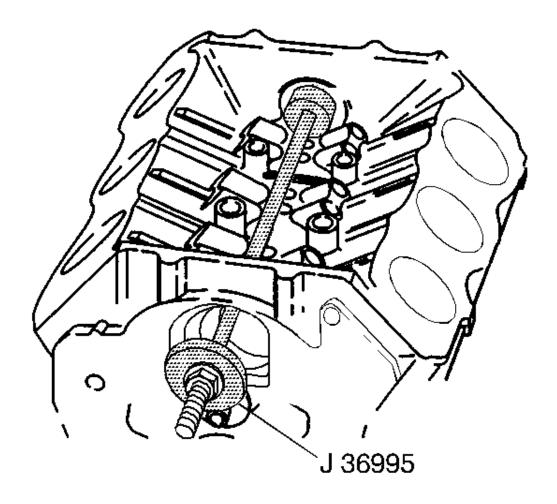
Removing Balance Shaft Bearing And/Or Bushing Courtesy of GENERAL MOTORS CORP.
